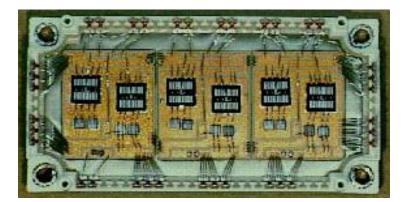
Internal view of 6-pack IGBT module manufactured by Infineon [10].
